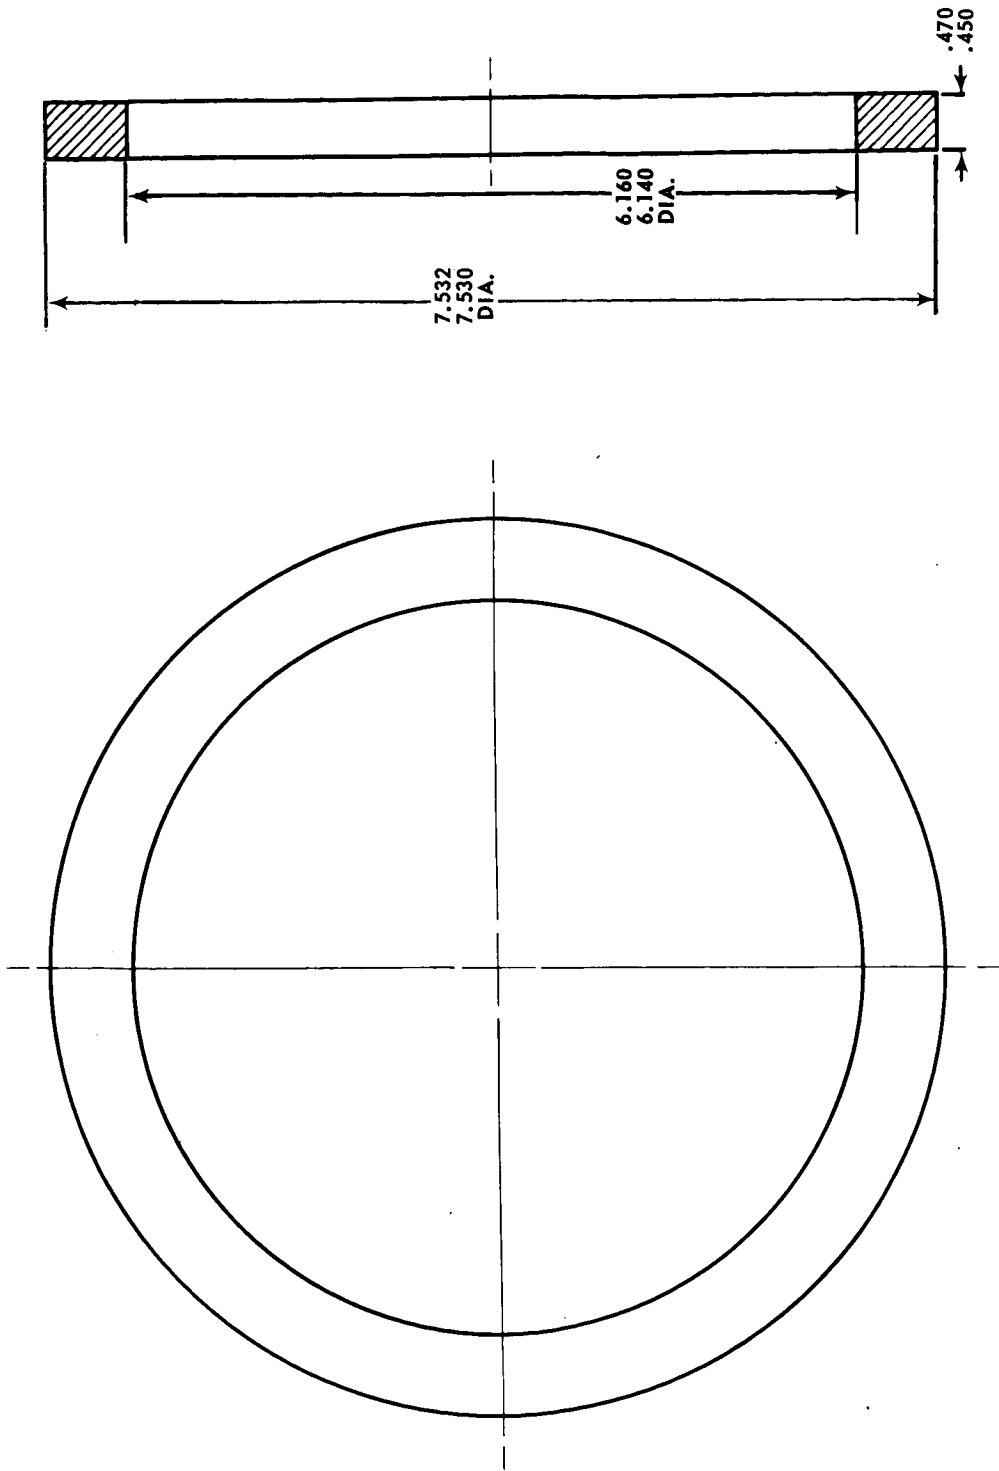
Carbon Wafer for Face Contact Bellows Secondary Seal
